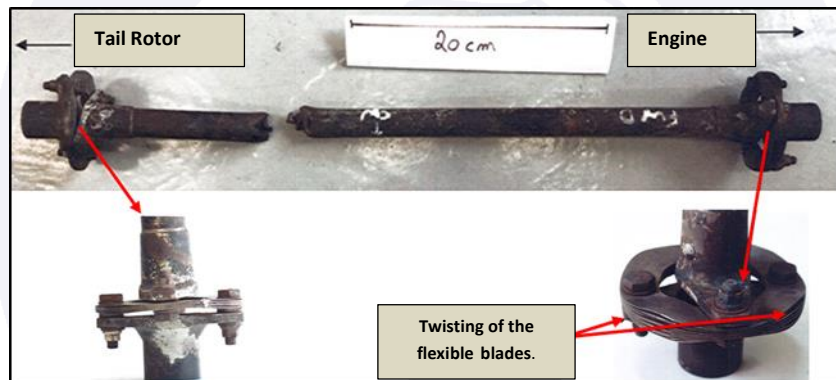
Twist of the flexible coupling blades of the tail rotor/Gearbox connection shaft.
